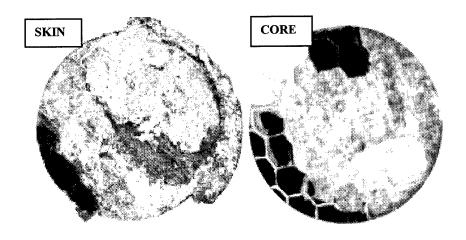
Failure surface images from the tensile test taken in location 4, refer Table 3, of the Stab-Tip Cap where skin to adhesive corrosion has degraded the honeycomb panel strength.
